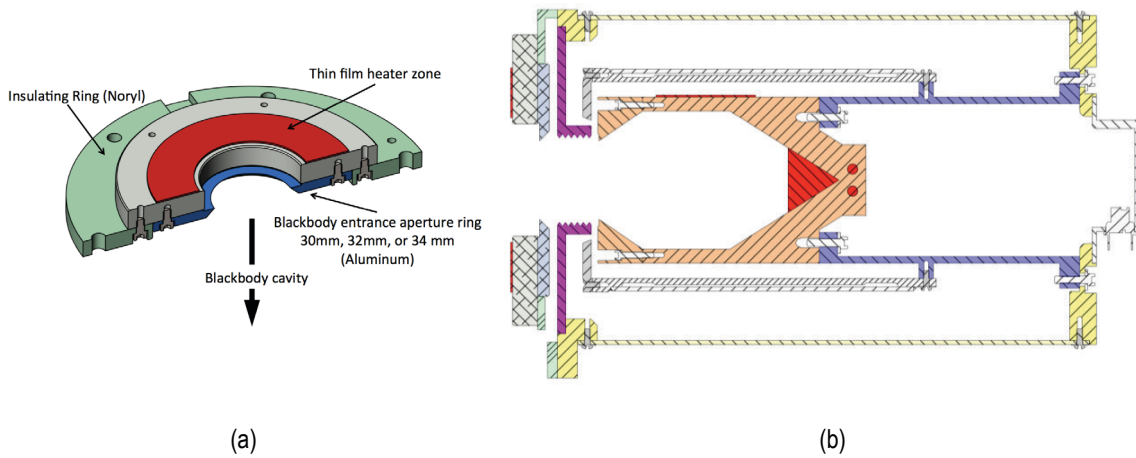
(a) Cutaway view of heated entrance aperture ring assembly with key components labelled, and (b) a cross-sectional view of the heated entrance aperture ring assembly installed on the OARS.
